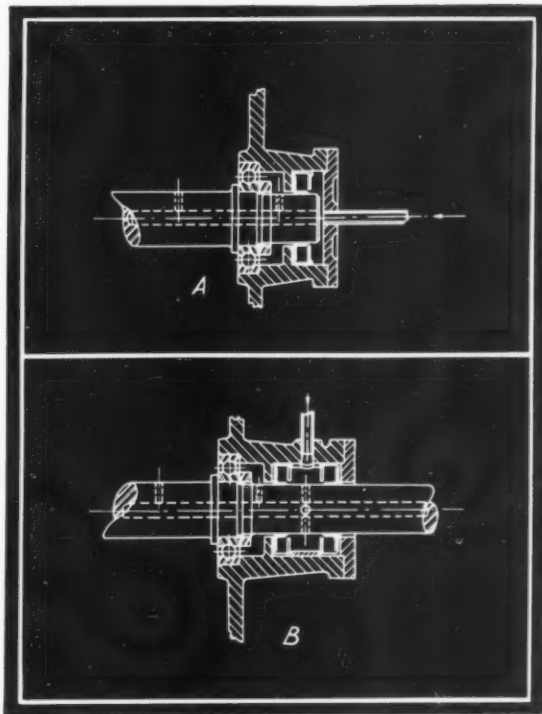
(A)—Oil admitted through the feed tube is confined by a single seal. (B)—If the shaft must pass through the housing, two seals are used
